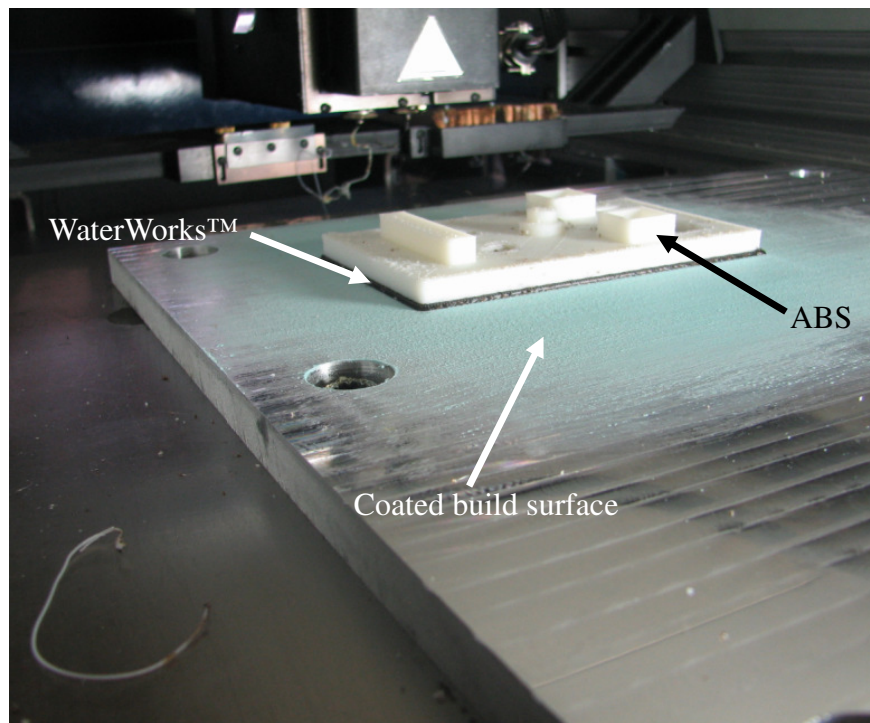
Complex structure built with FDM machine directly on UC build plate.
